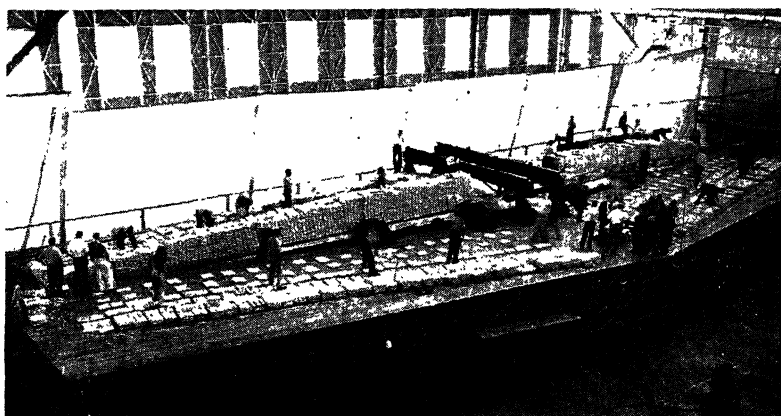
Proof static test of large cantilever metal wing using sand bags.
